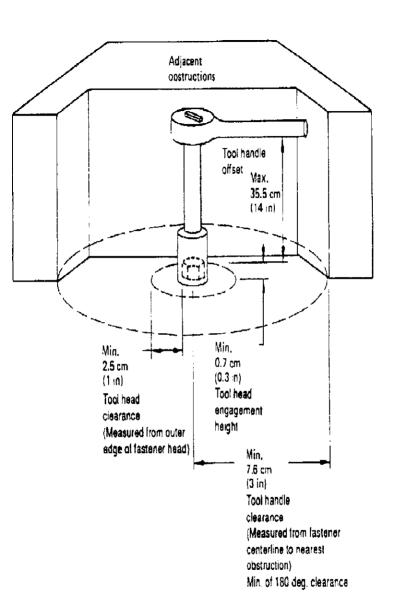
Tool Access Requirements (IVA)
